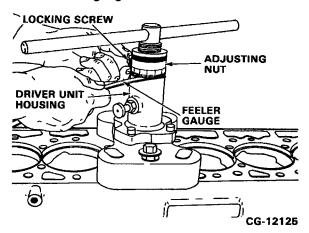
Set Cutting Tool Depth Method Two (Using Feeler Gauge)
